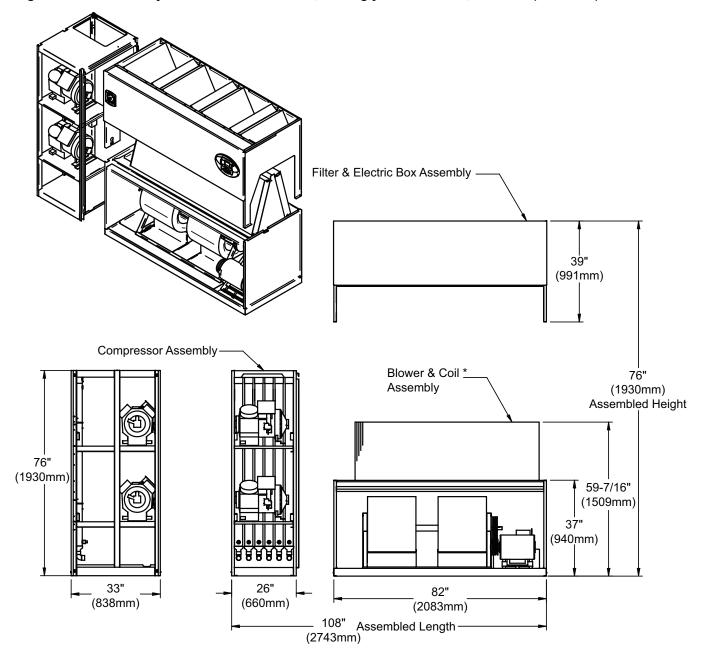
Disassembly dimensions - downflow, water/glycol/GLYCOOL, 53-77kW (15-22 ton)-all
